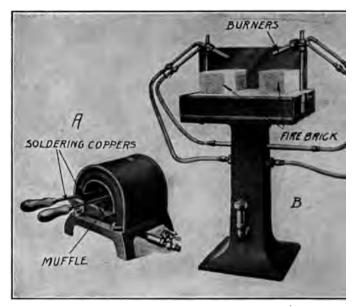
Furnace Used for Heating Soldering Coppers at Efficient Brazing Forge at B.
